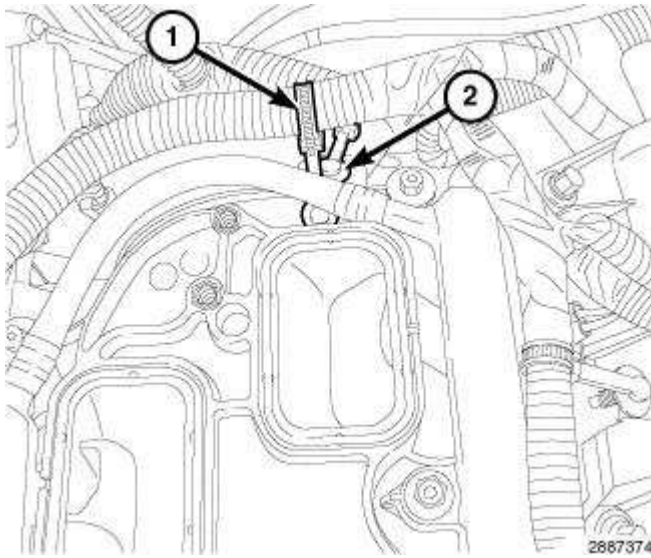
Injection/Ignition Harness Retainer & Main Wire Harness Retainer
